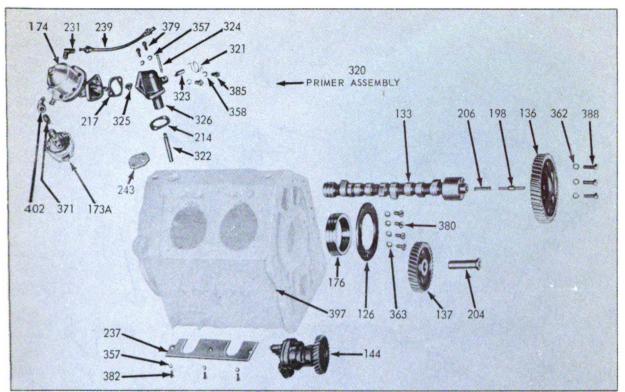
, CAMSHAFT AND FUEL PUMP MOUNTING GROUP
